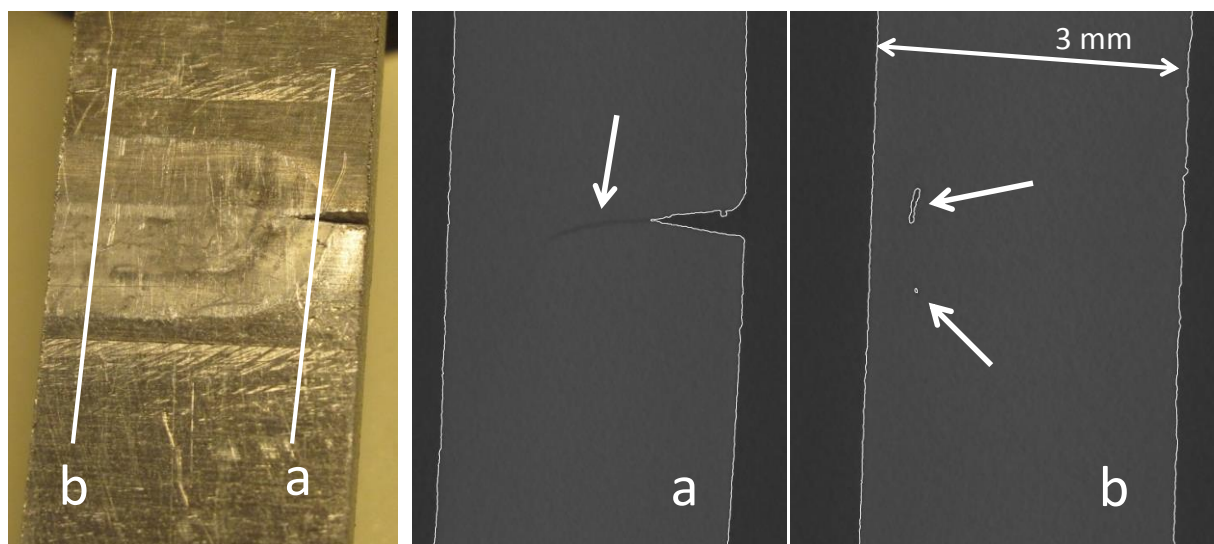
Friction stir weld sample. Photograph (to the left) showing the bottom side of the start of the weld with the position of the virtual 2-D slices indicated. In slice a, a lighter material (presumably oxide from the surface) can be seen. In slice b, porosity is shown.
